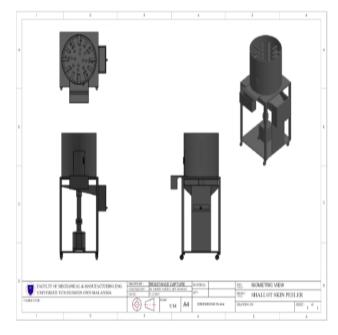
Assembling of Shallots Skin Peeler Machine
